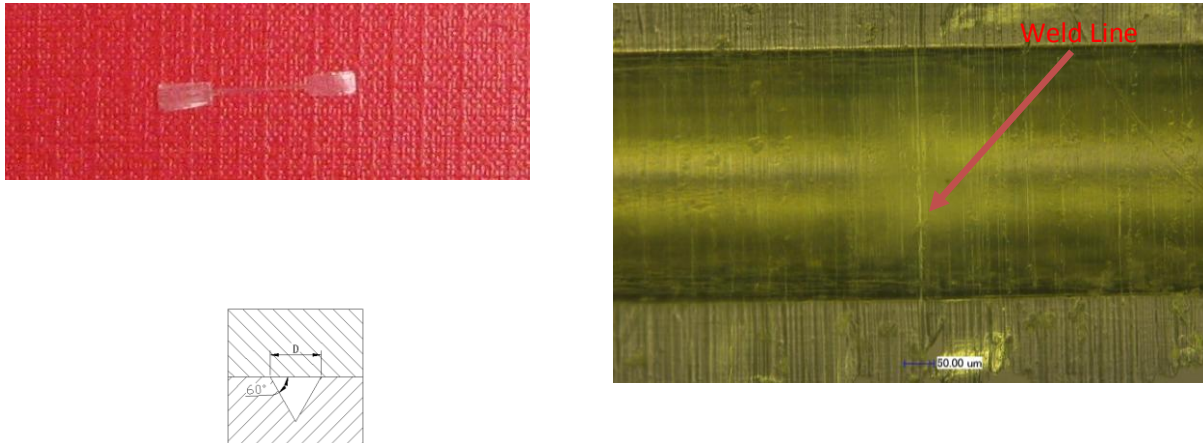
Micro tensile specimen with equilateral triangle and its weld line
